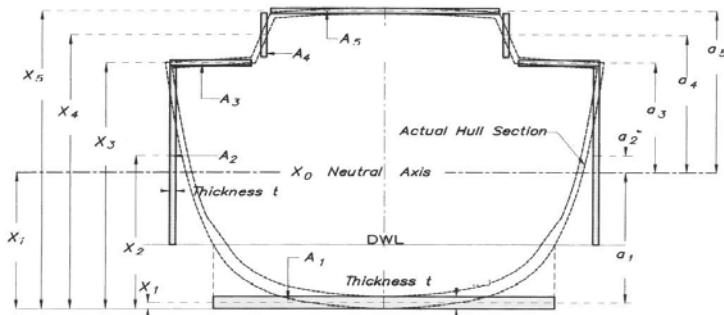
Example of simplified section of hull girder section (Larsson and Eliasson, 2007).
